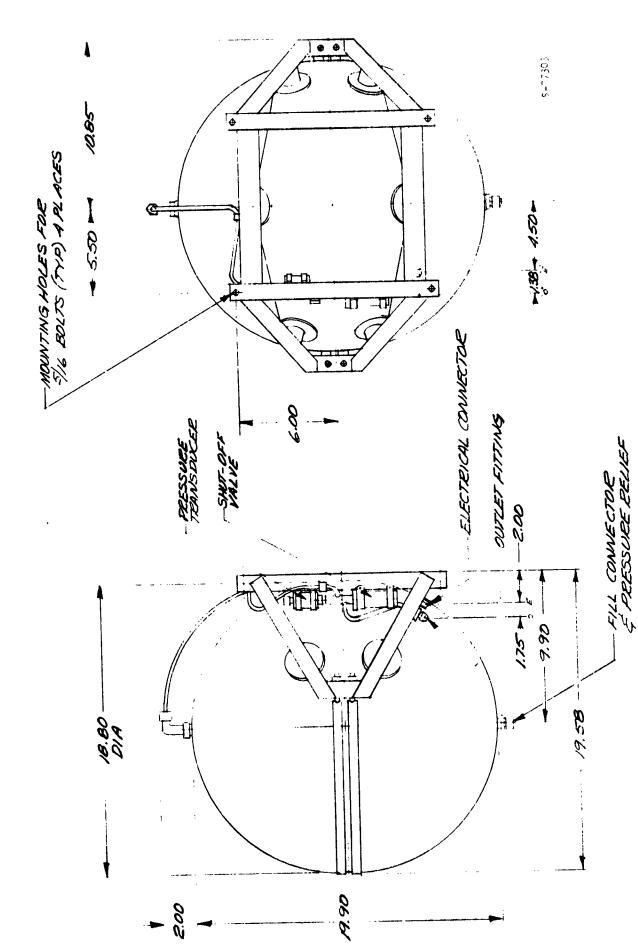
Oxygen-Nitrogen Storage Tank Assembly, IRU 1-M
